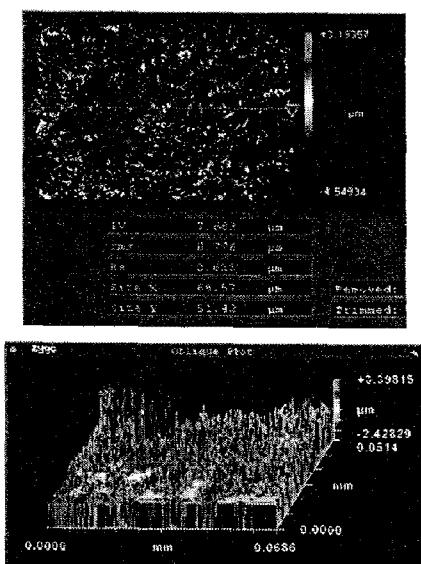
Machined shape of fused silica glass surface roughness by powder blasting (Ra=0.625μm)
